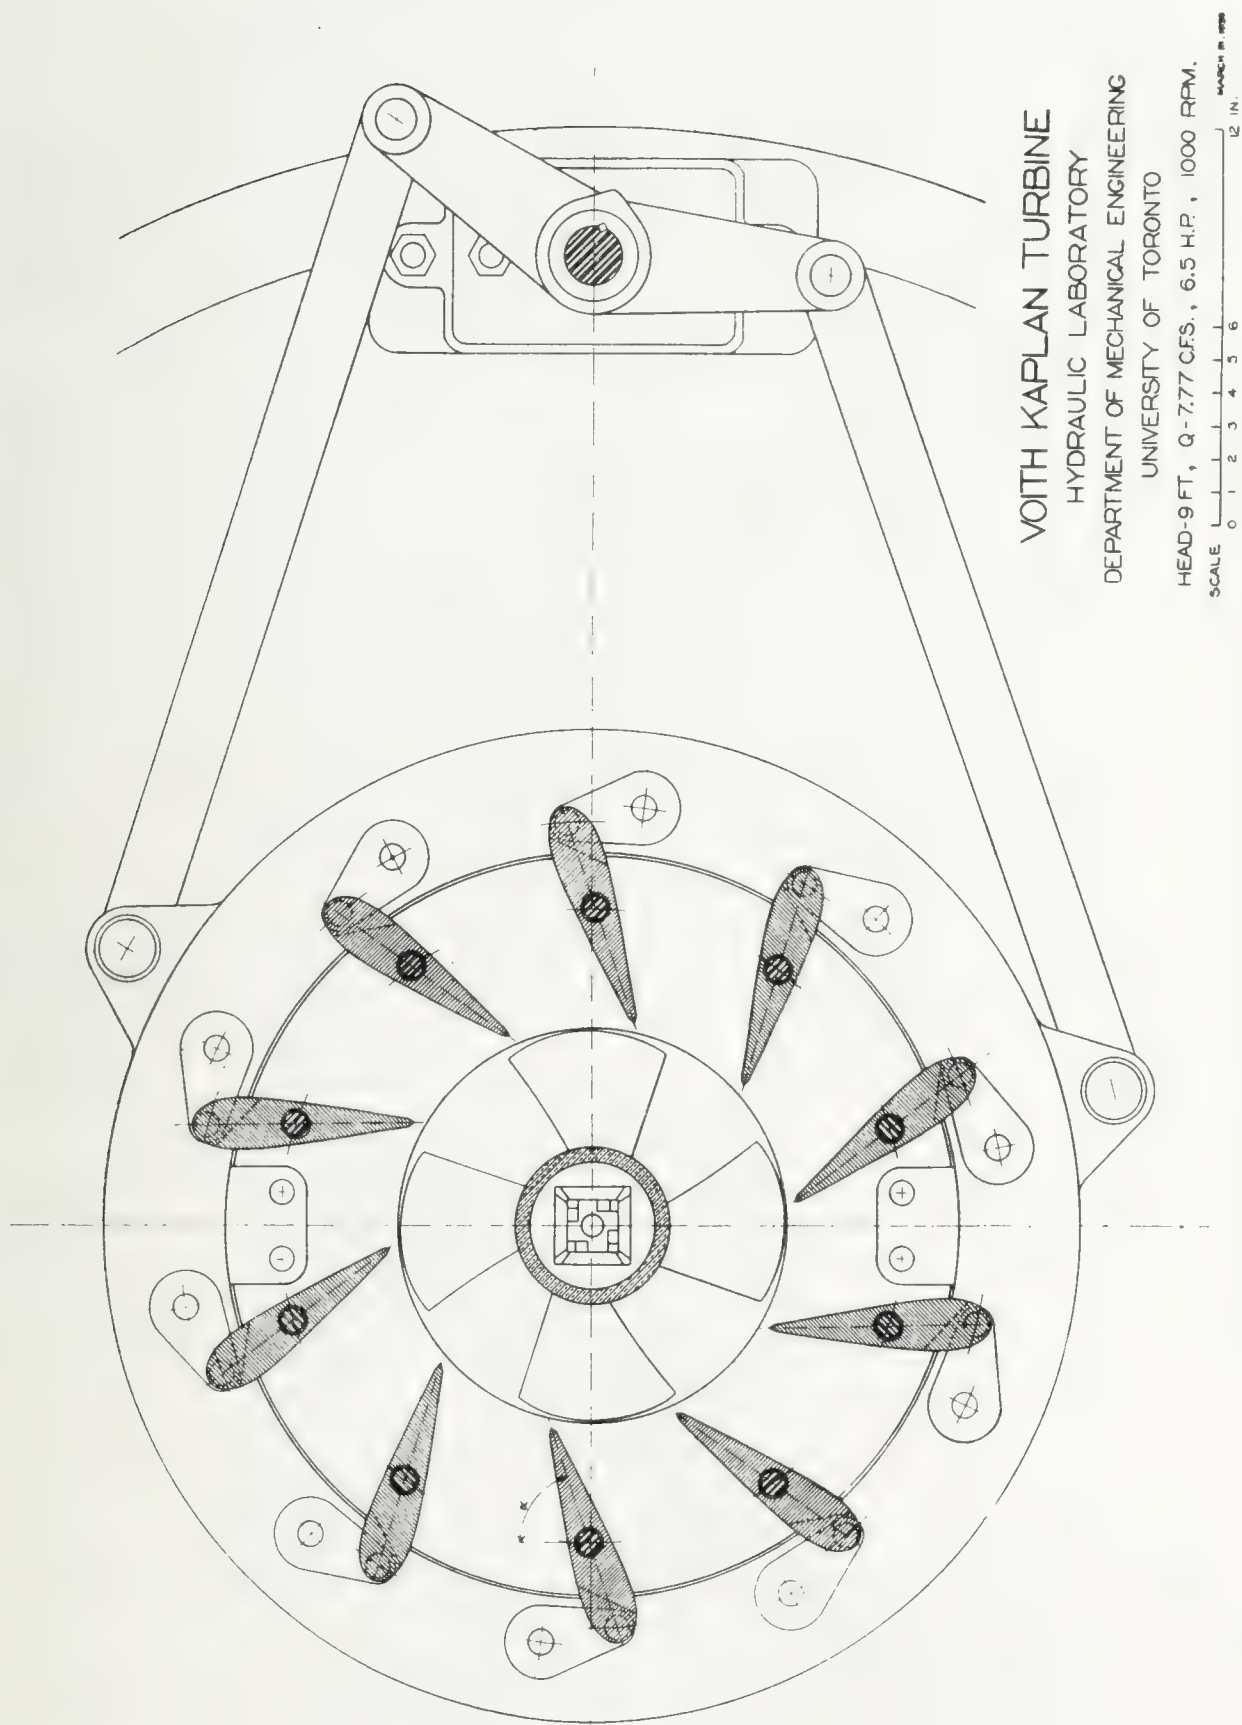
Horizontal Section of Kaplan Turbine Tested.
